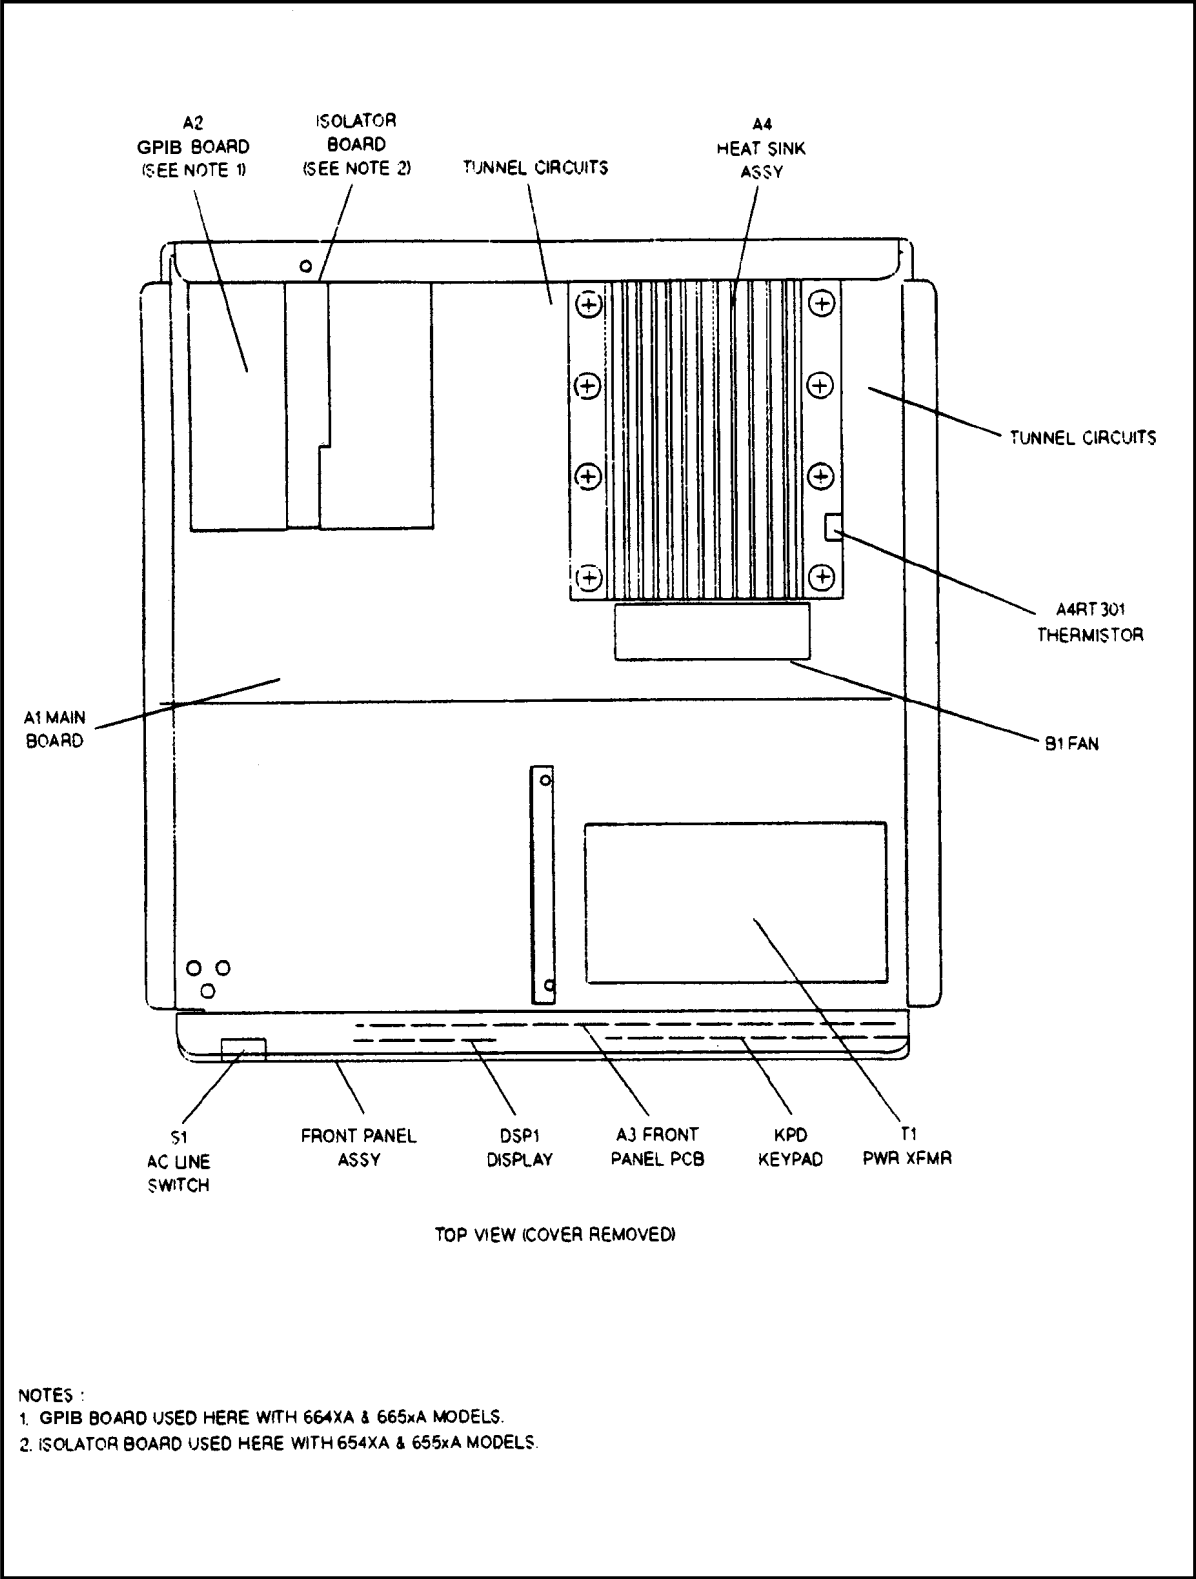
Top View with Cover Removed for 655xA & 665xA Models, (Sheet 2 of 2)
